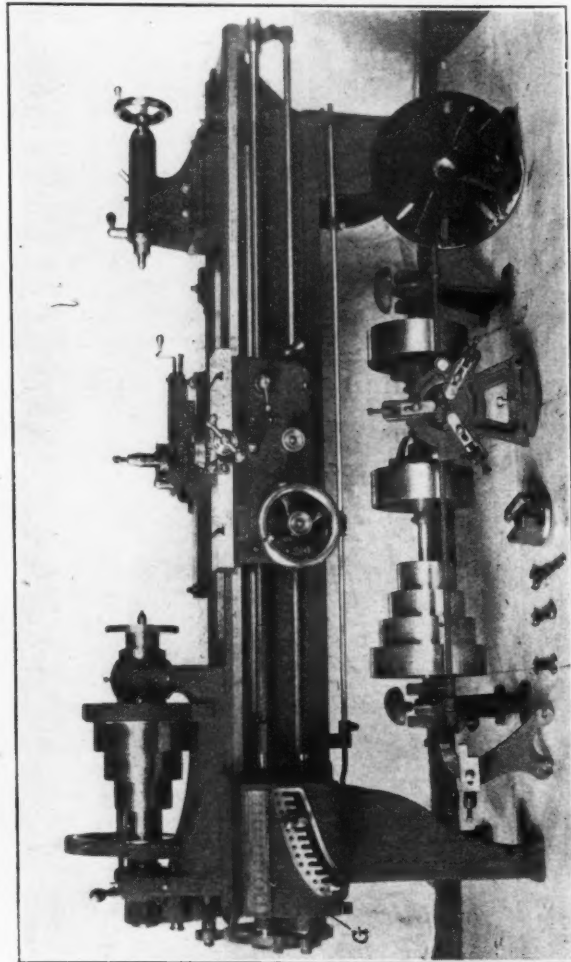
HENDEY-NORTON ENGINE LATHE, SHOWING ARRANGEMENT OF GEAR-BOX.
